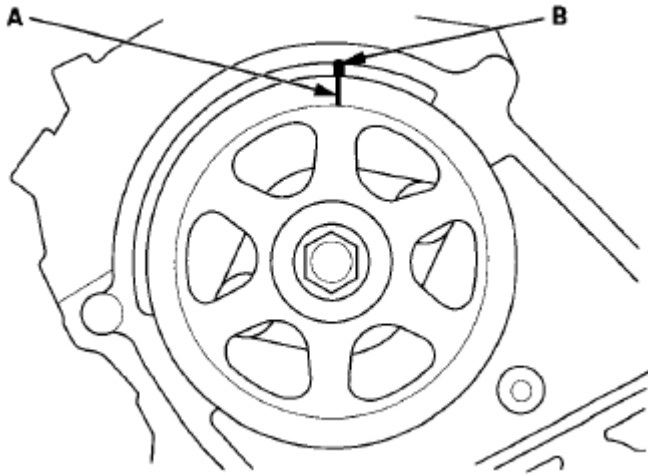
Identifying TDC Marks And Pointers On Camshaft Pulley (Rear)
